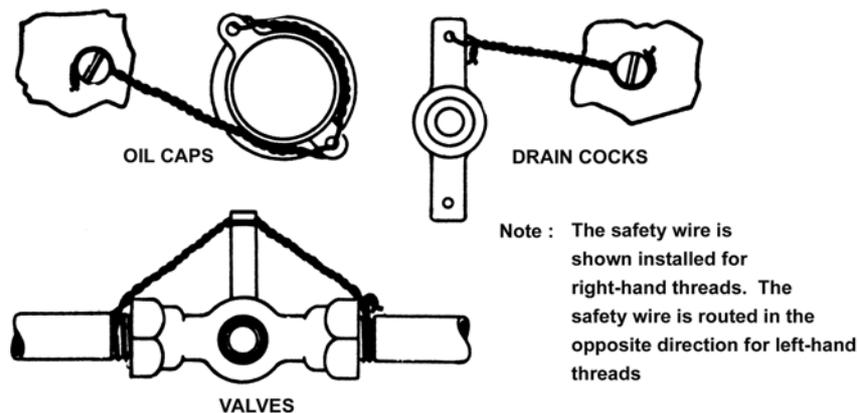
, Safety wiring oil caps, drain cocks, and valves.
